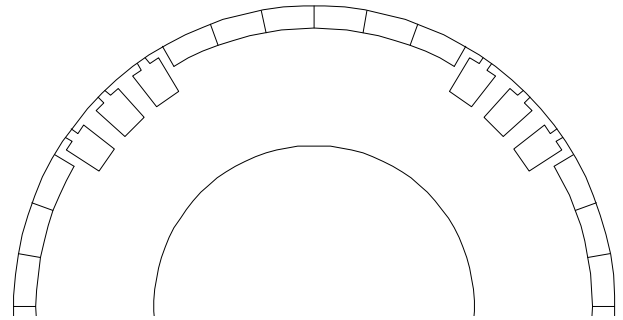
Part of a cross sectional view of the 4-pole rotor.
